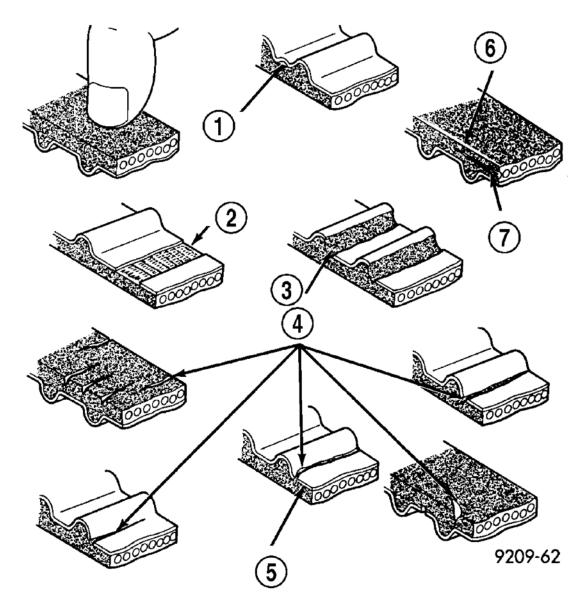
Timing Belt Inspection Courtesy of CHRYSLER LLC
